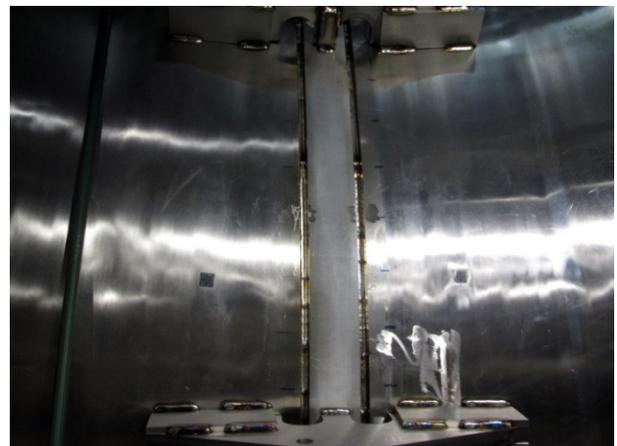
Close view of splice plate welding between VV-D02 and VV-D03
